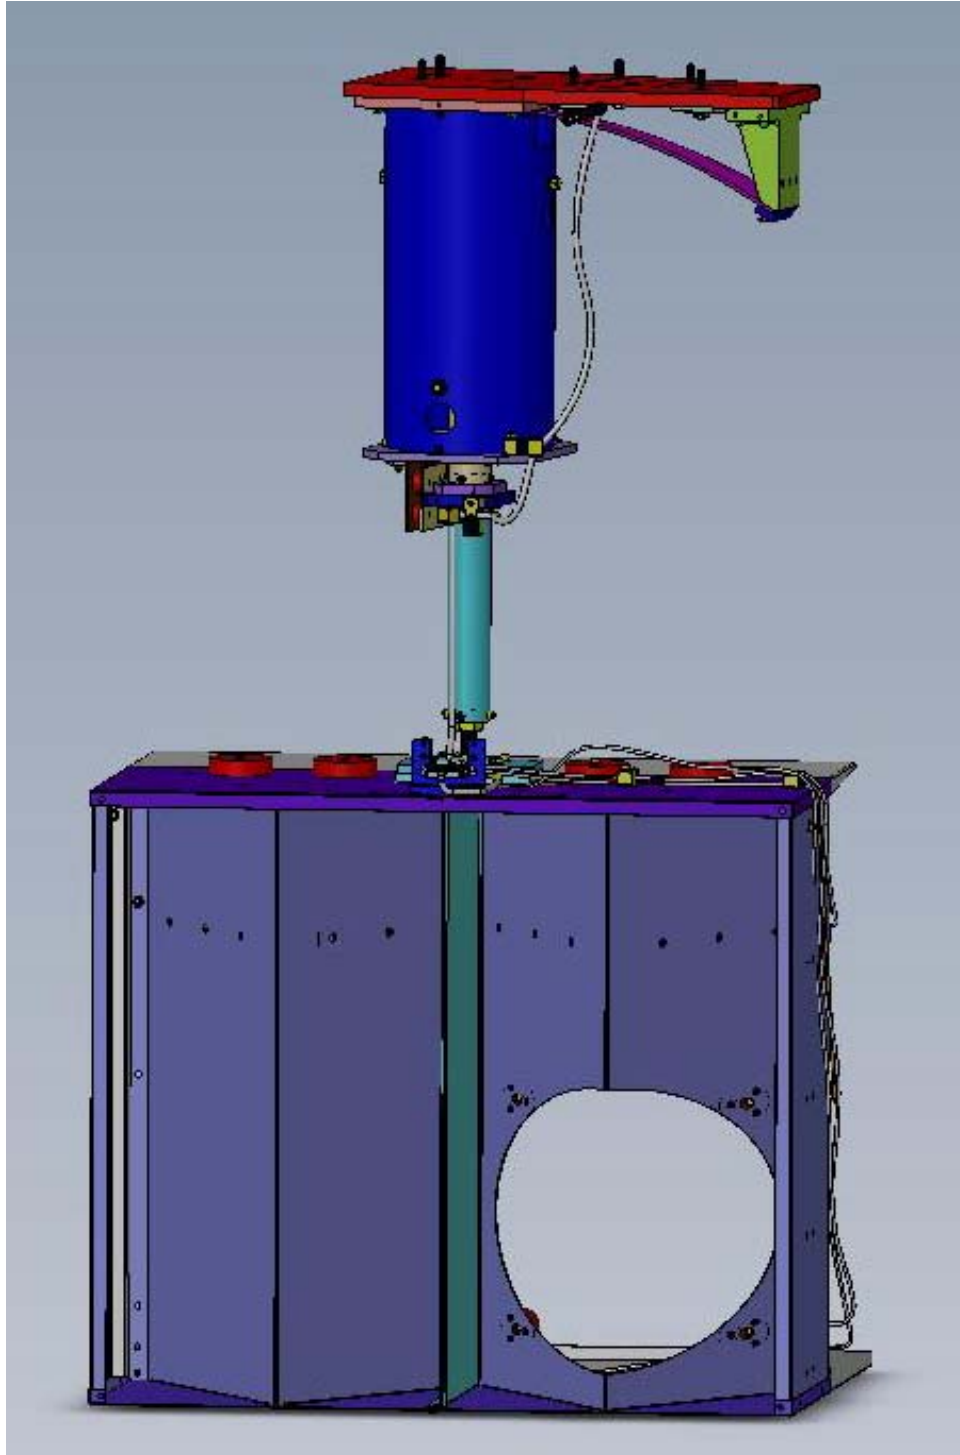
1-Hole Right, Arm Cavity Baffle Assembly
